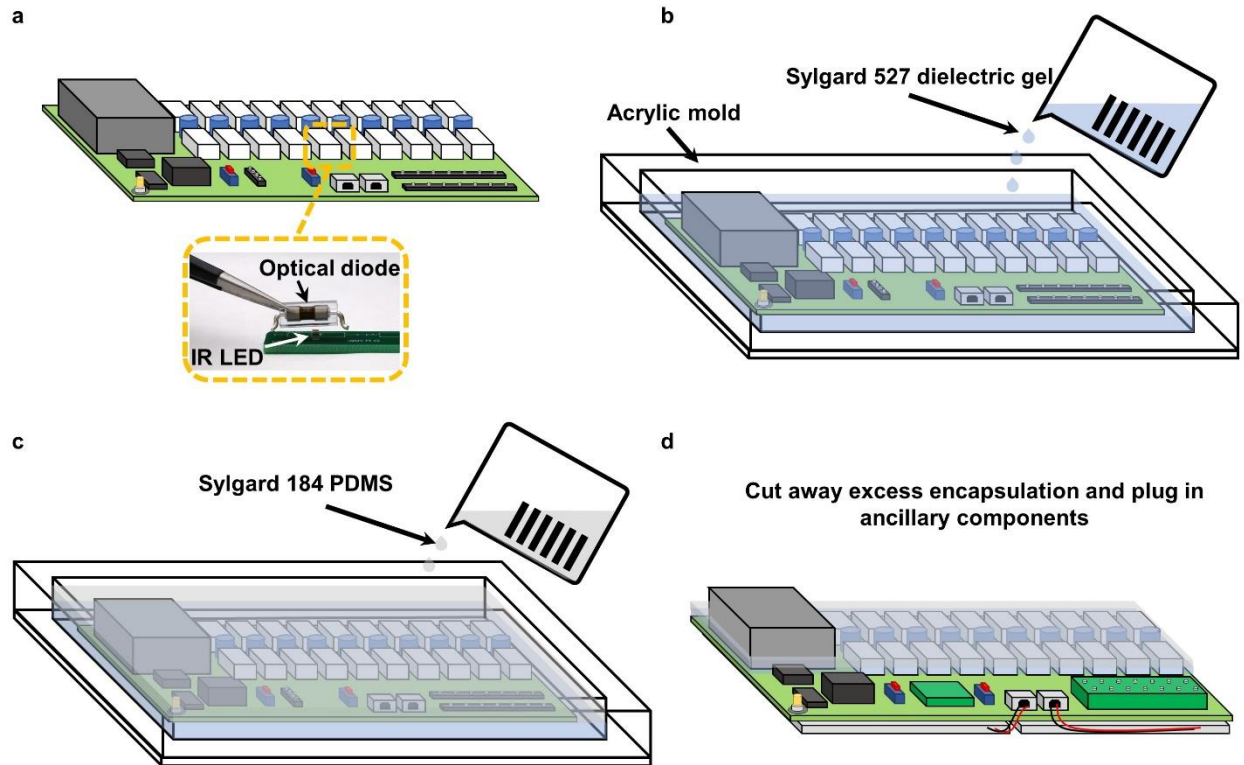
Construction of the 10-channel HVPS. a) Components were soldered onto the PCB. The custom optocouplers were constructed by placing the optical diode directly on top of the IR LED and soldering in place. b) An acrylic mold was used to encapsulate the PCB with dielectric gel (Sylgard 527, Dow Corning). c) The gel is extremely tacky in its cured state, so a polydimethylsiloxane (PDMS) silicone elastomer was used to coat the gel to prevent the PCB from sticking surfaces. d) The excess encapsulation was cut away and the ancillary components (microcontroller, 5 V regulator, and batteries) were plugged into the PCB.
